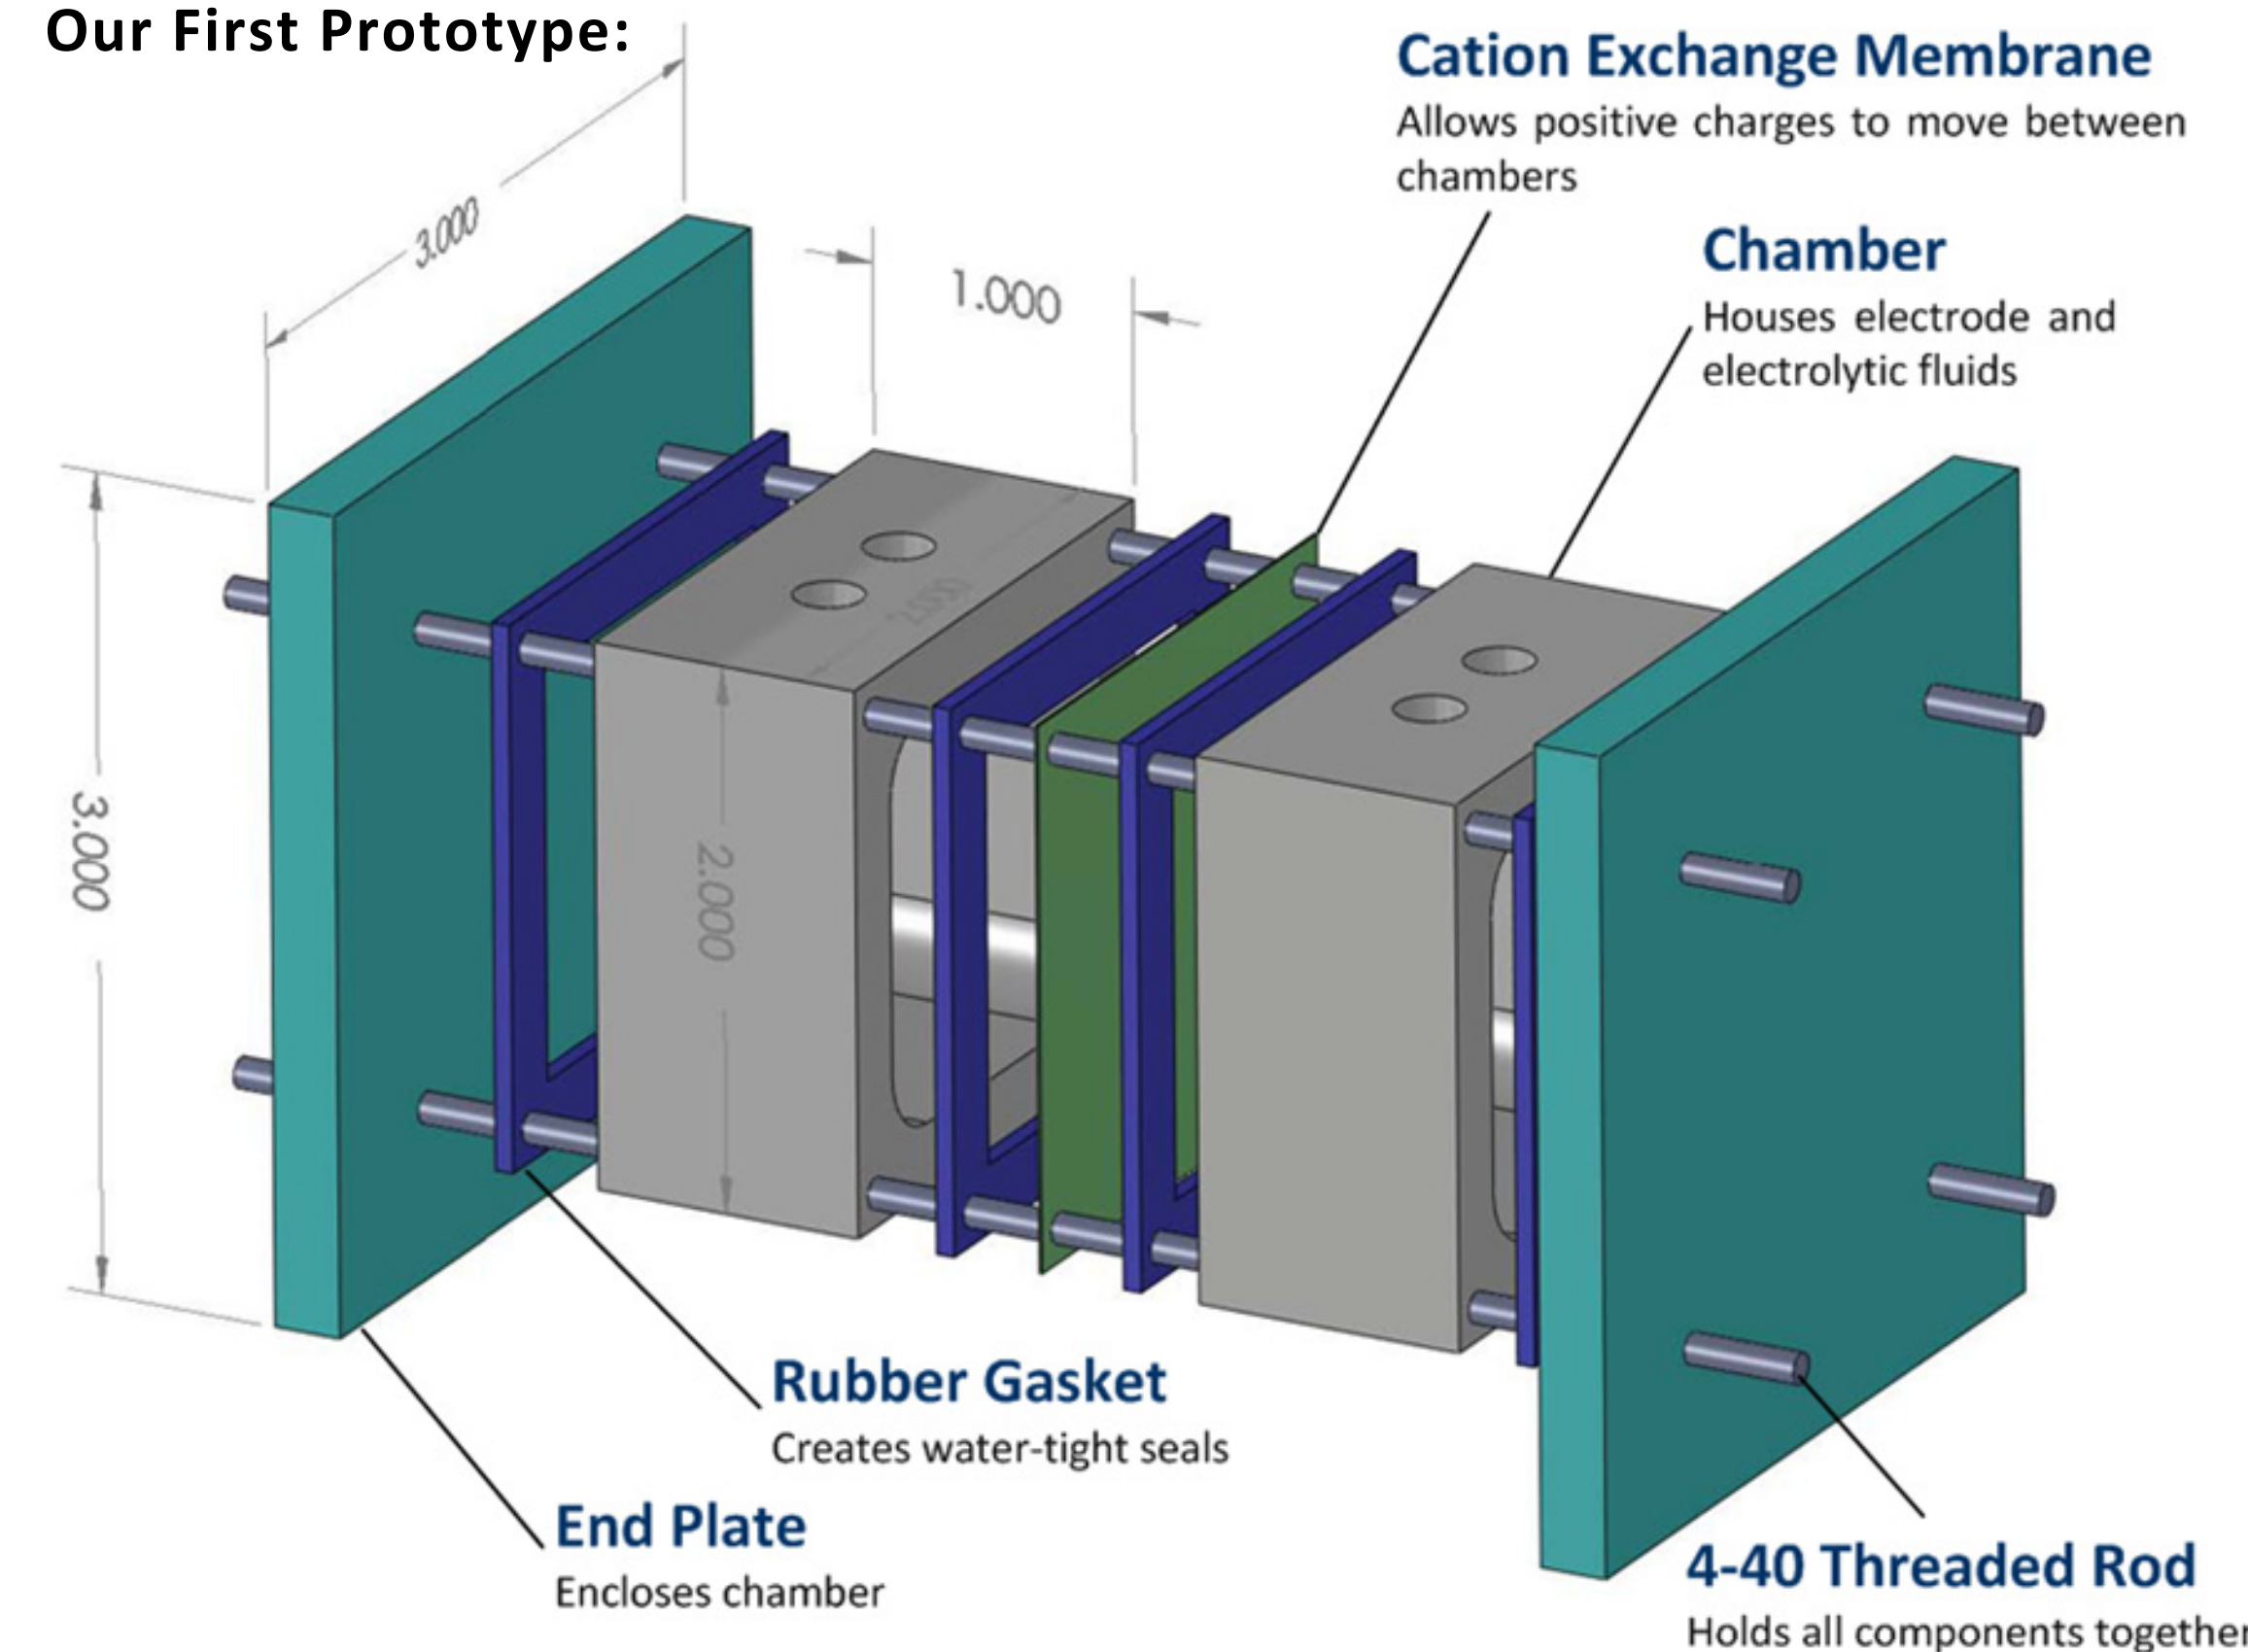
Exploded SolidWorks Assembly of MFC. Dimensions are in inches.
